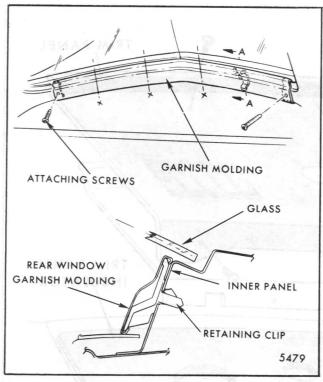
Back Window Lower Garnish Molding - "B-57" Styles
